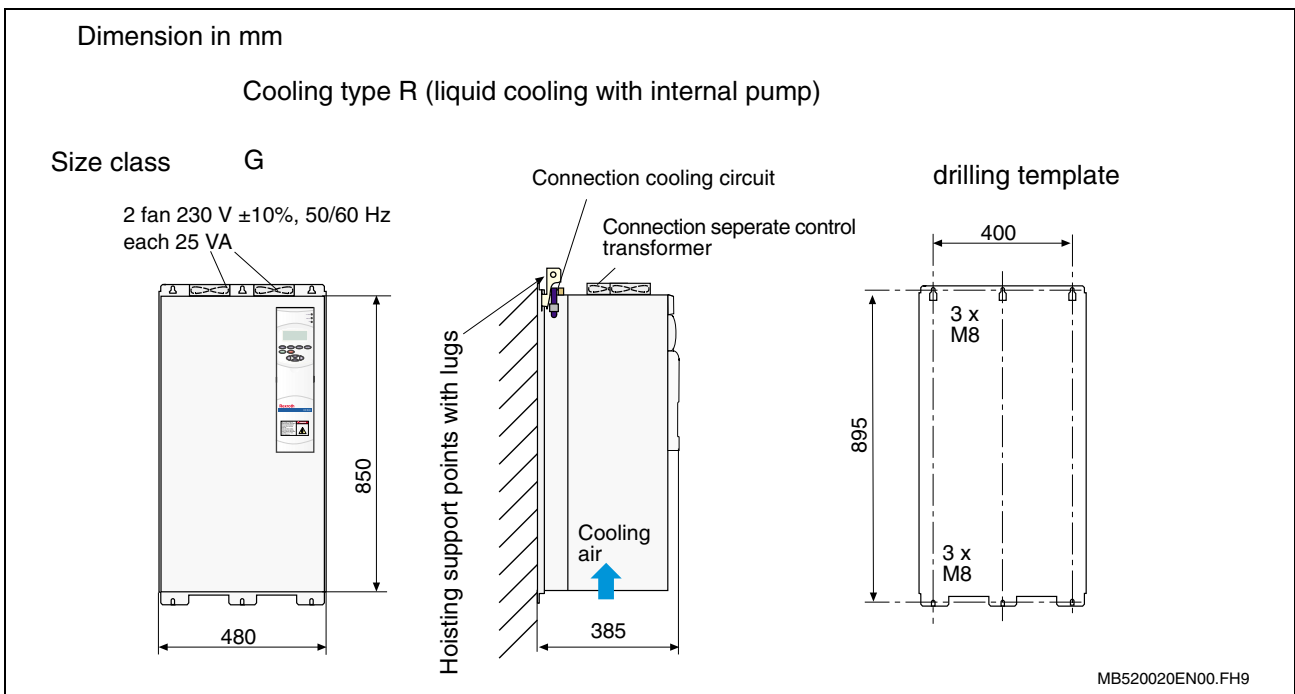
Dimension sheet of inverter, size classes G with cooling type R
